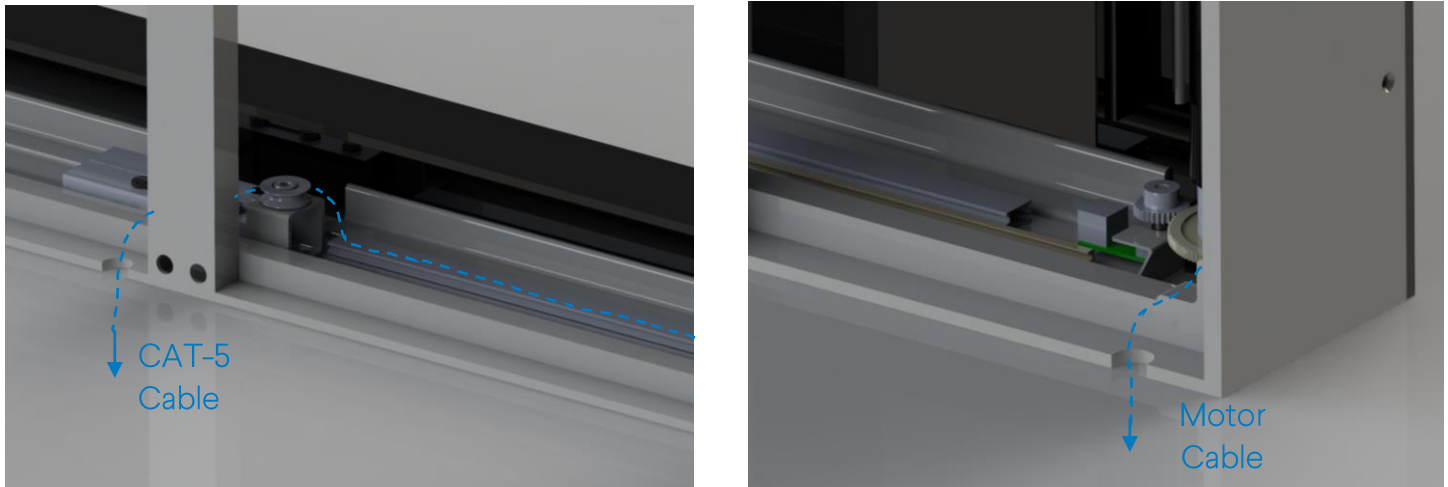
Audience Left CAT-5 and Motor Cable Detail Rear View
